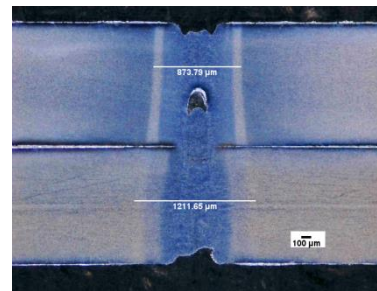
HAZ wide measurement: 154 μm DP980 side; 209 μm TRIP780 side.
